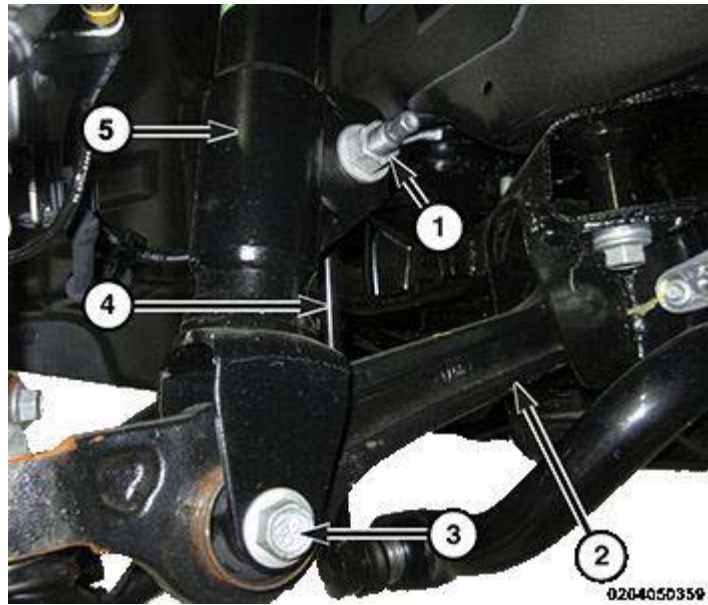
Stabilizer Link To Strut Nut, Lower Control Arm, Lower Control Arm Bolt, Stabilizer Link & Shock/Strut Assembly
